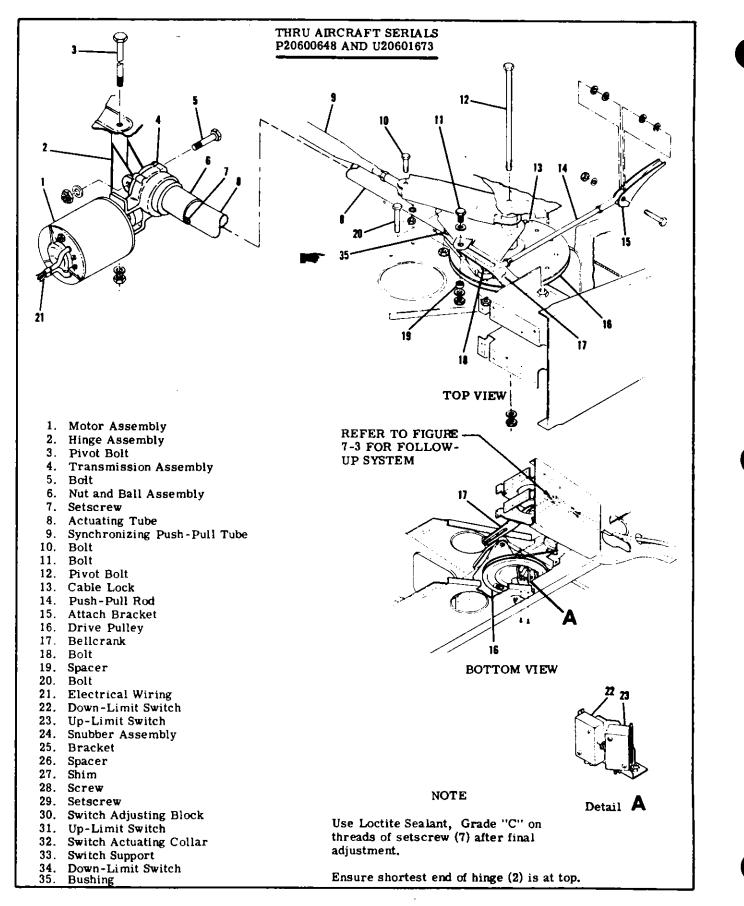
Flap Motor and Transmission Assembly (Sheet 1 of 3)
